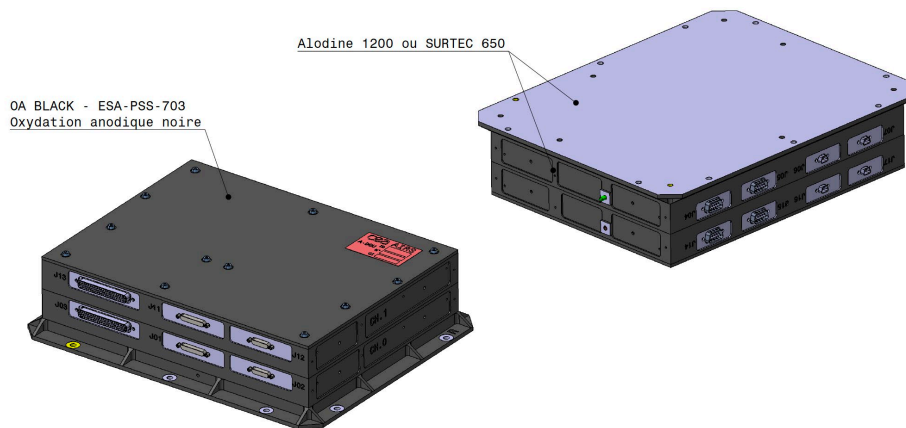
A-DCU Box mechanical layout (overall dimensions: 327*257*85 mm³, mass (CBE) = 4.4kg)
